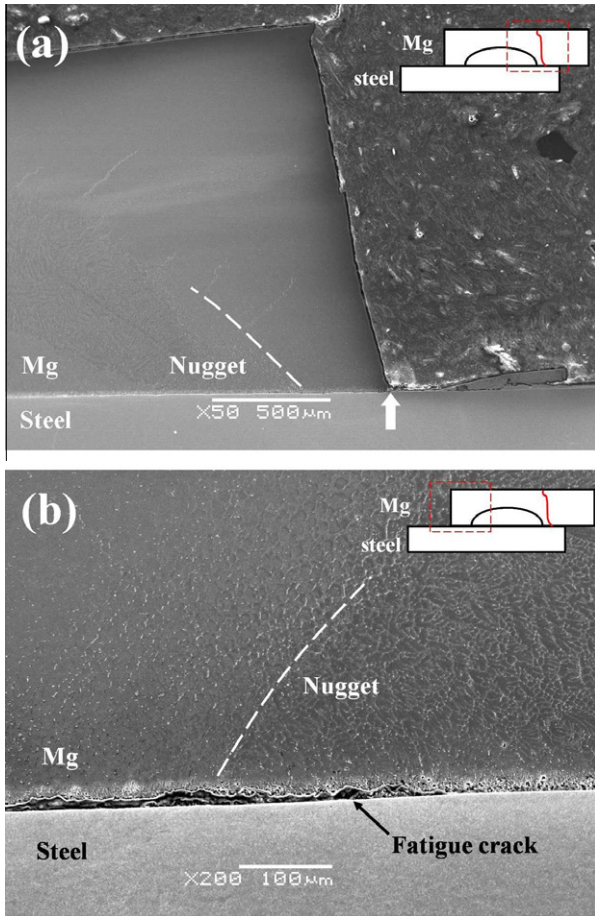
Mg/steel spot weld after fatigue test at a maximum load of 2.0 kN: (a) Mg end; (b) steel end.
